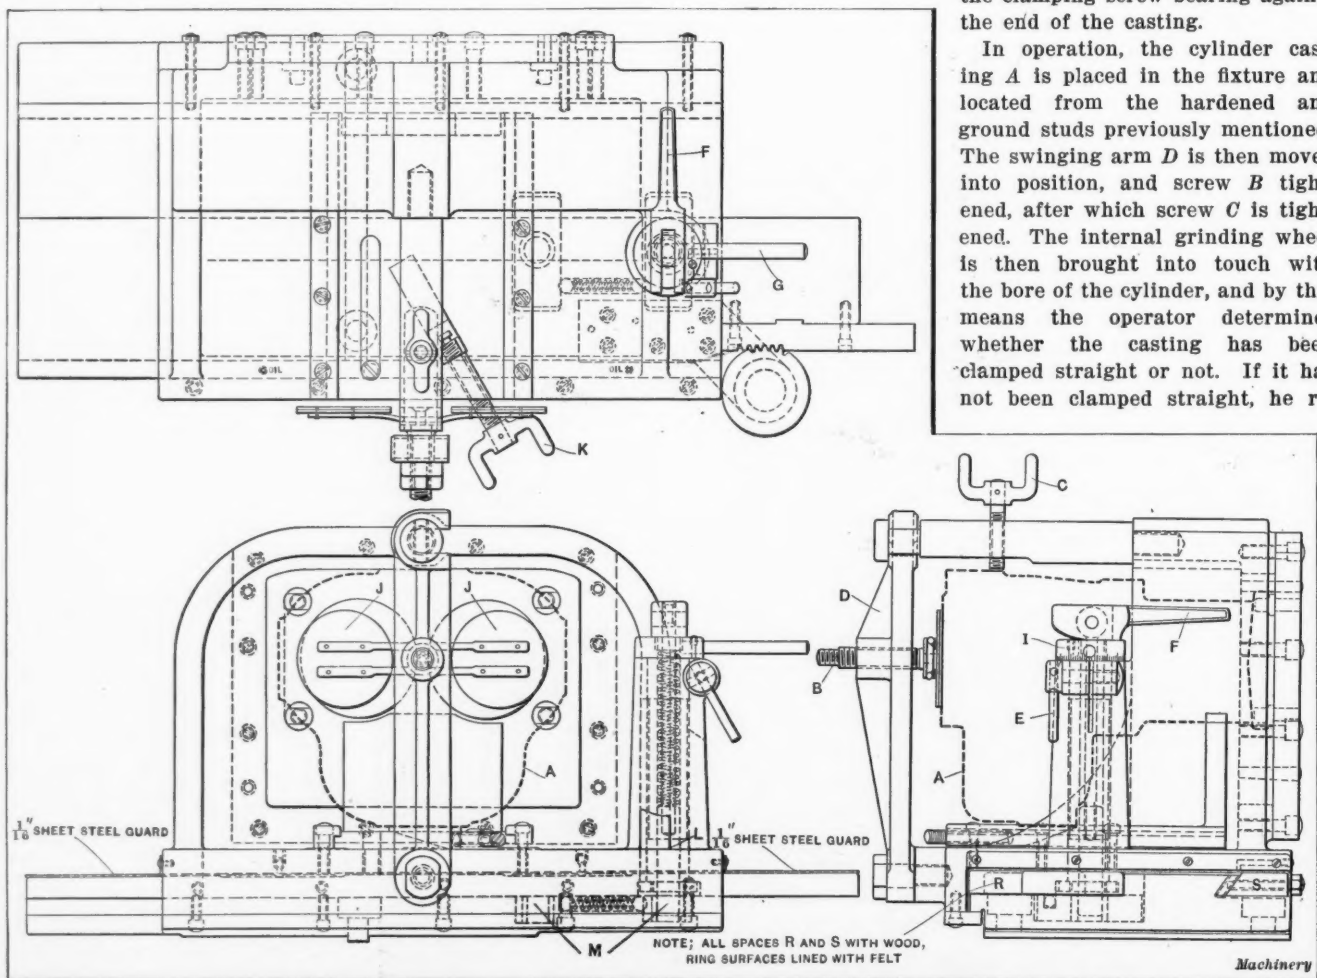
Special Type of Fixture used on Brown & Sharpe Cylinder Grinding Machine shown in Fig. 20
